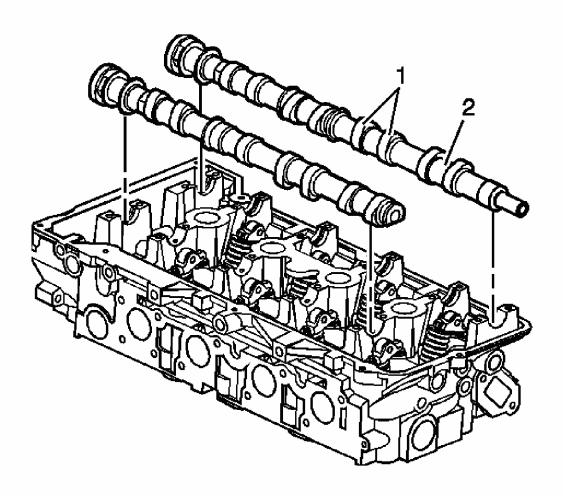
Identifying Camshaft Lobes & Journals Courtesy of GENERAL MOTORS CORP.
